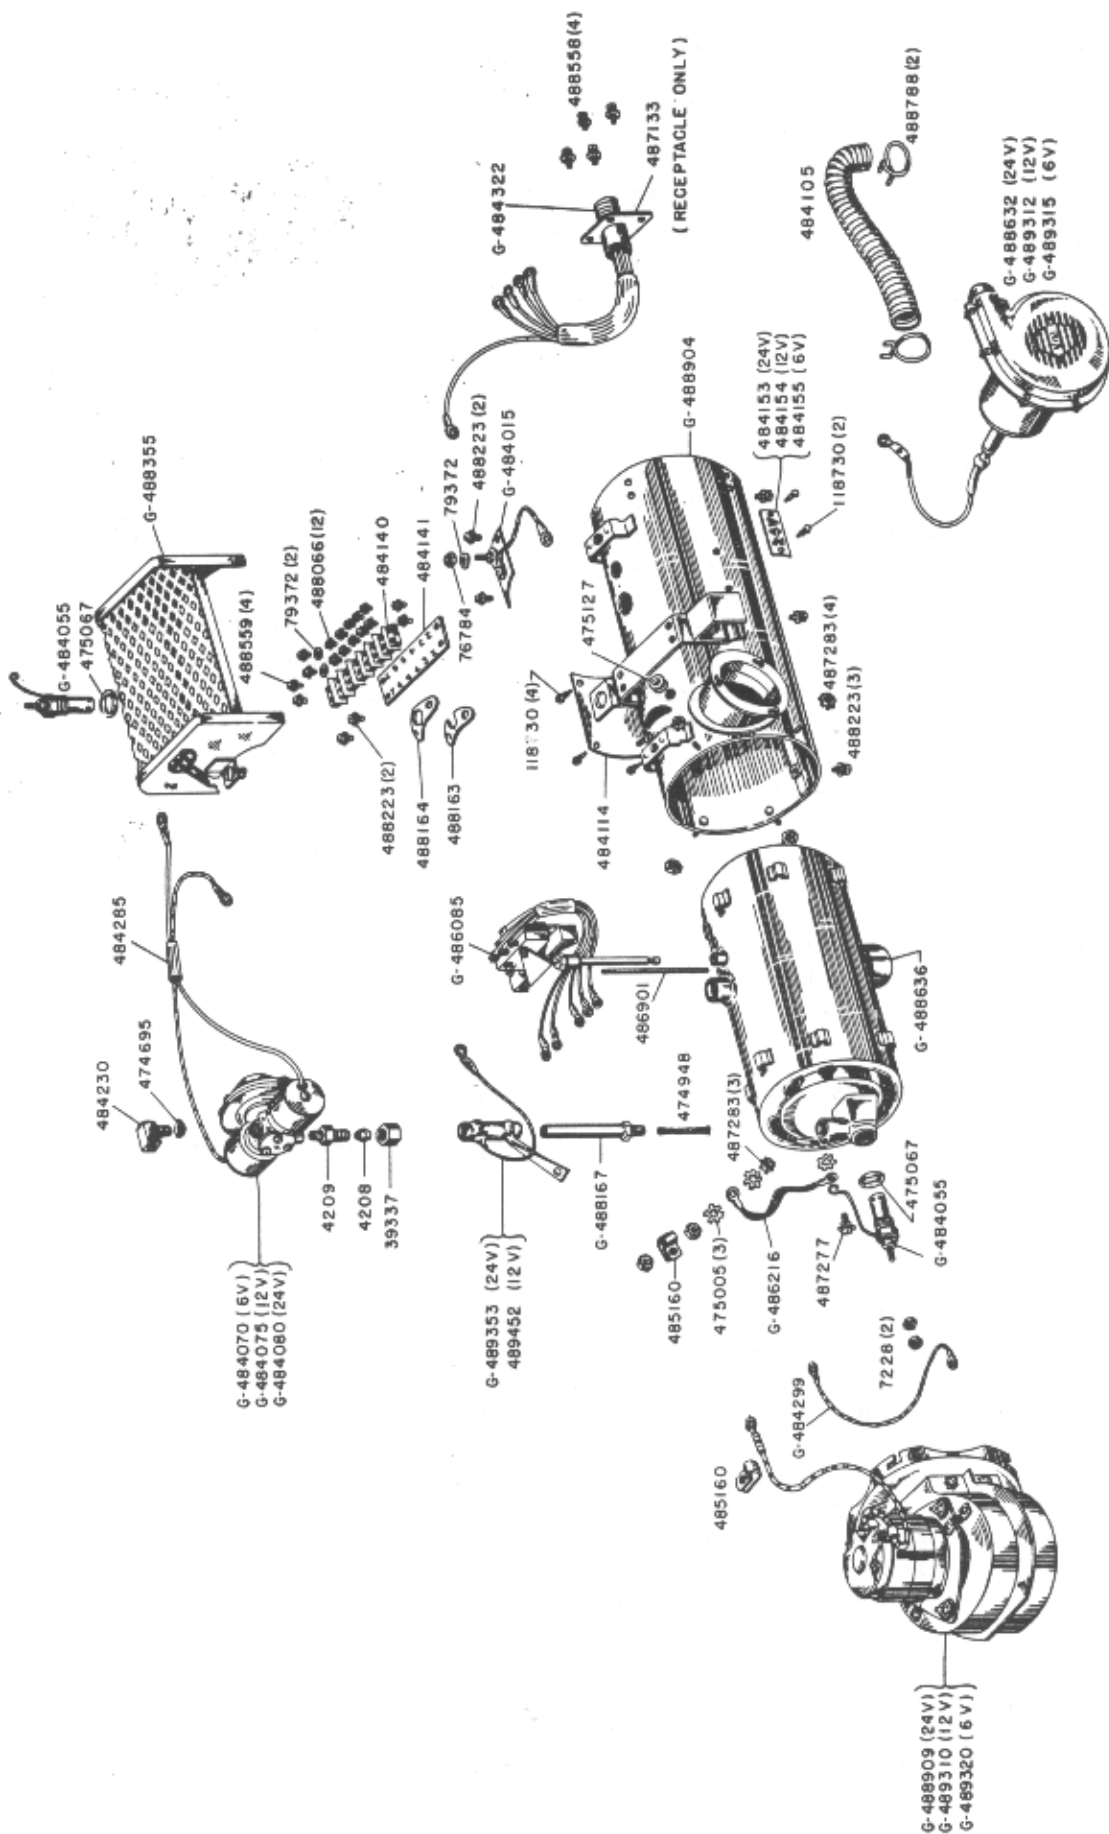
Exploded Parts View, Model 978-M-H Series Heaters
